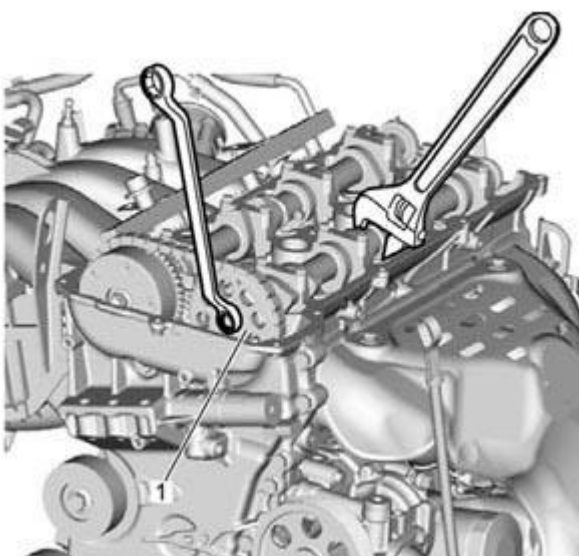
Identifying Timing Chain Links On Cmp Actuator And Exhaust Camshaft Timing Sprocket
